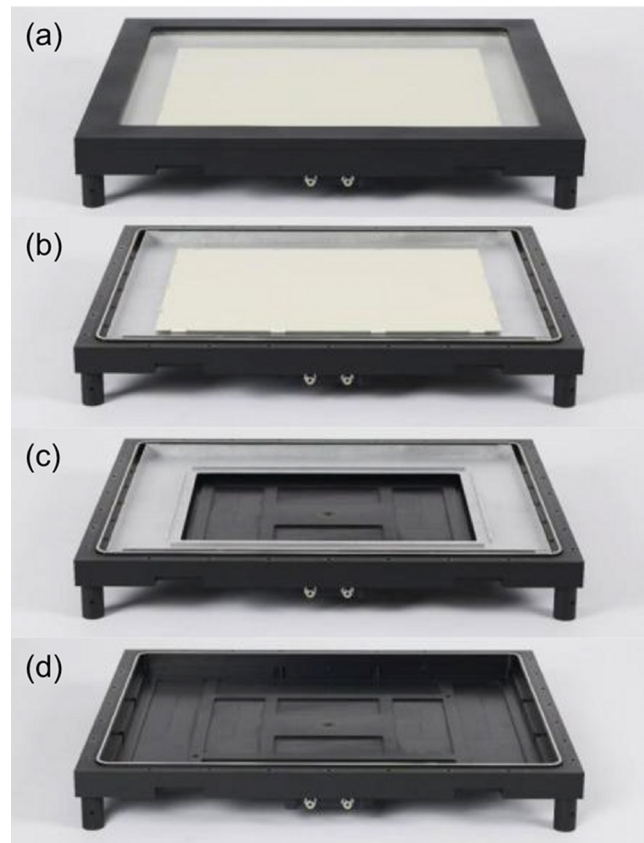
Images showing disassembly of the case components: (a) complete assembly; (b) lid removed; (c) document support plate removed; (d) base only.
